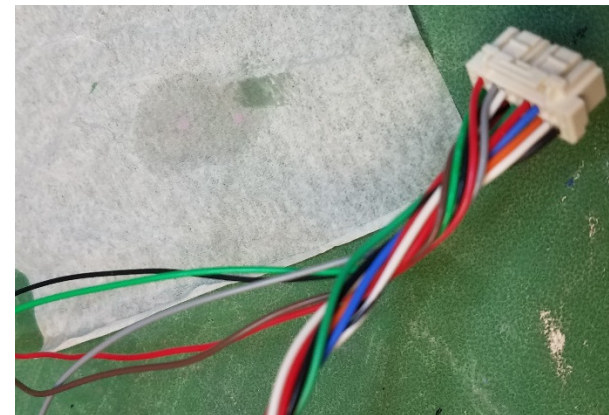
Top Endcap Cable Assembly, 20-Pin Connector
